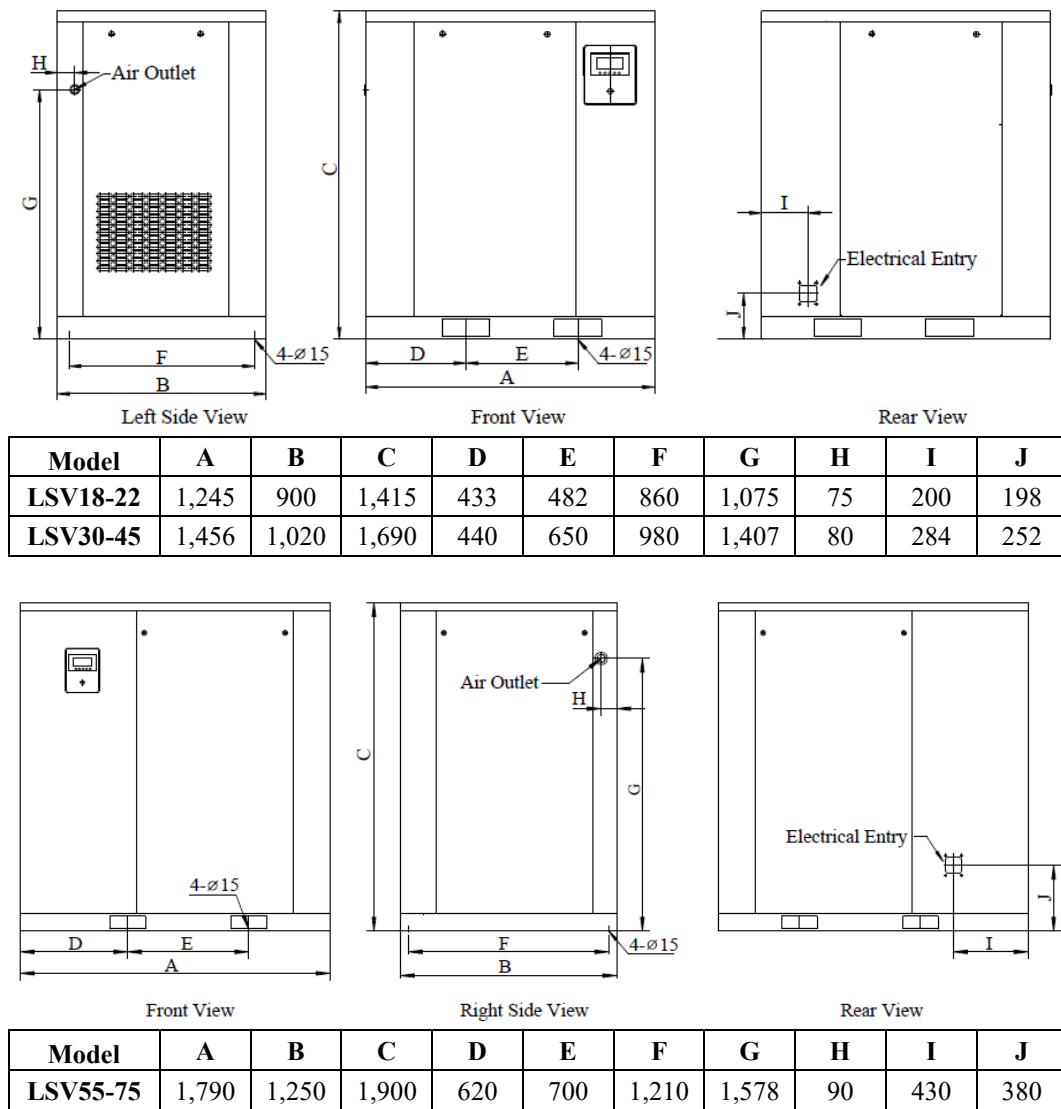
Outline Dimensions of LSV Series (in mm)
